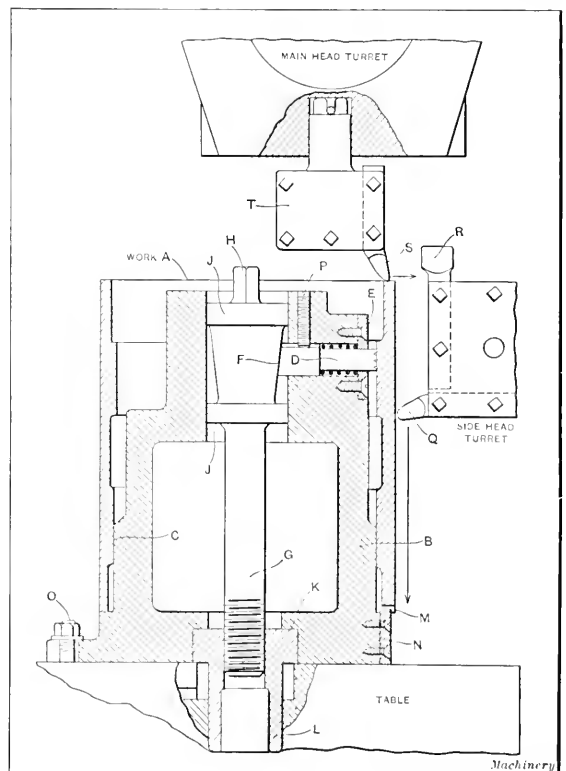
Second Setting for machining Casting shown in Fig. 7
